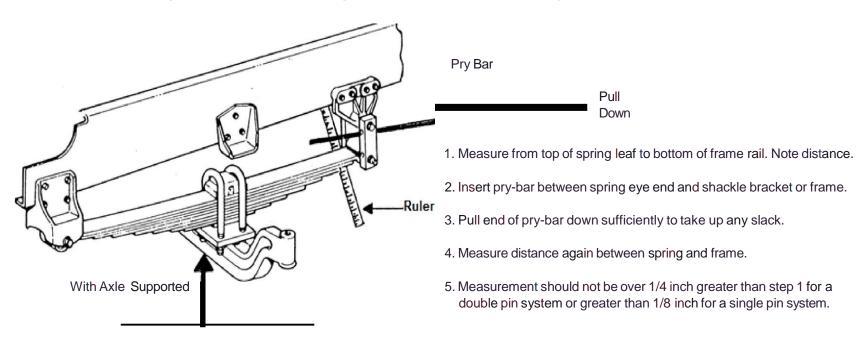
Front Spring Shackle Pin and Bushing Play Check
